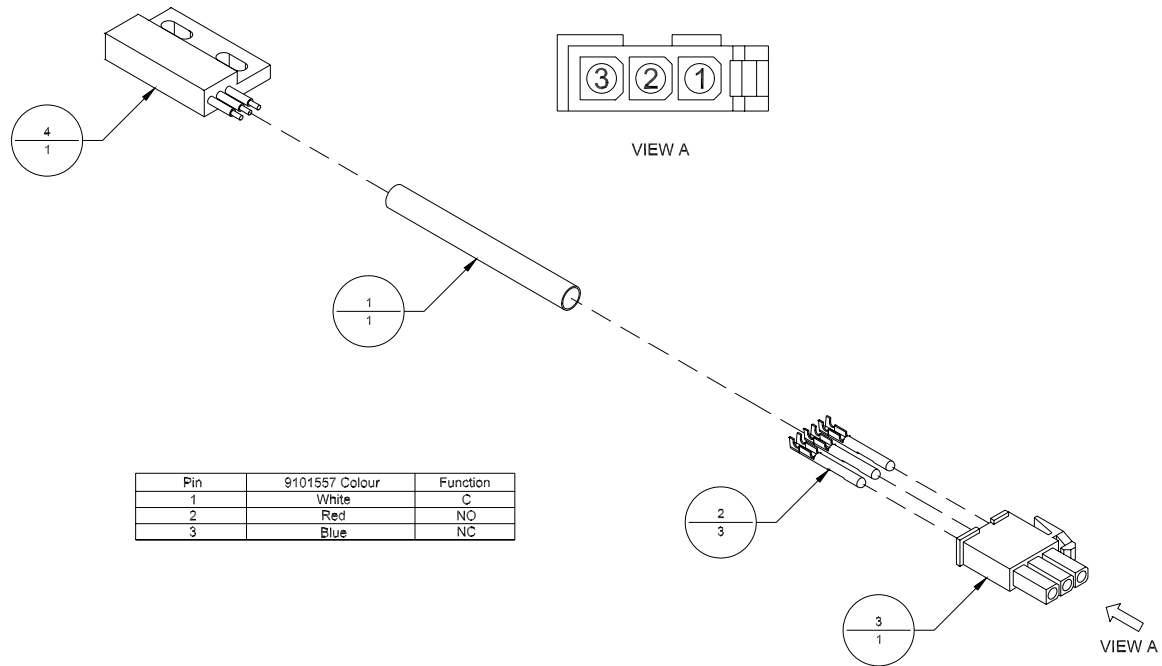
Sensor, Magnetic, NO/NC Cable (9101557A)
